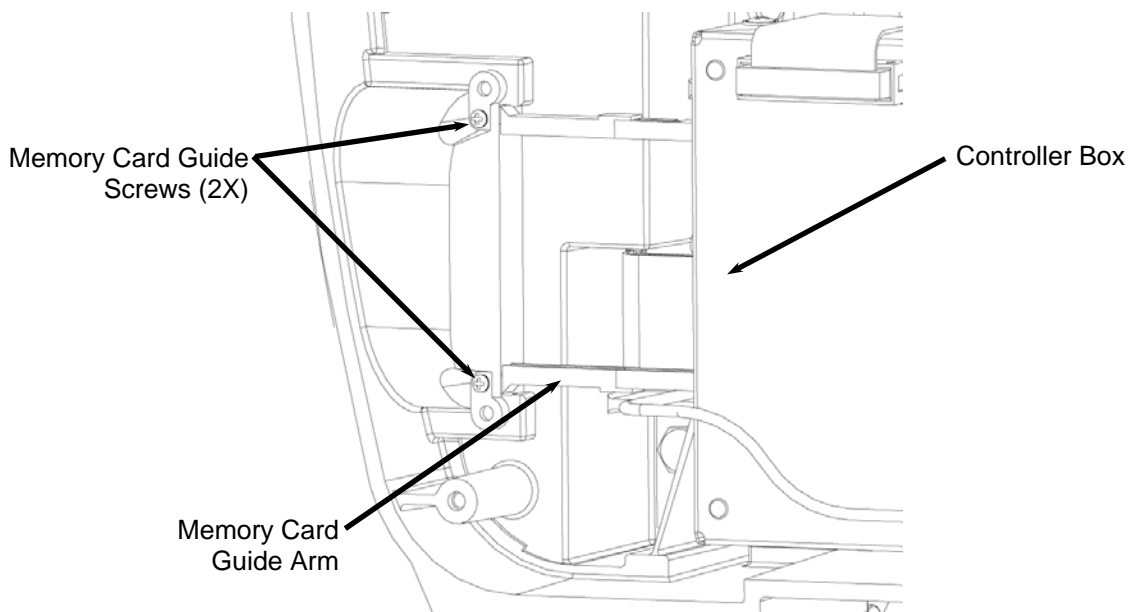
REMOVAL OF SCREWS SECURING THE MEMORY CARD GUIDE ARMS
